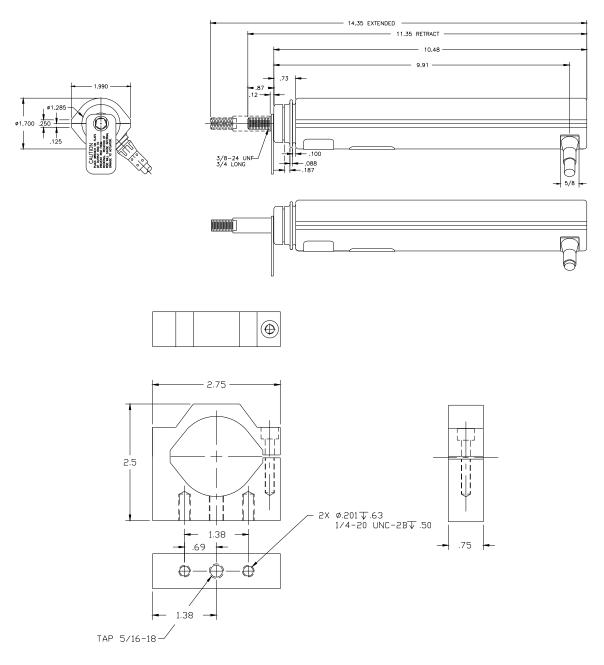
722 Series Actuator with Mounting Clamp (dimension in inches)
